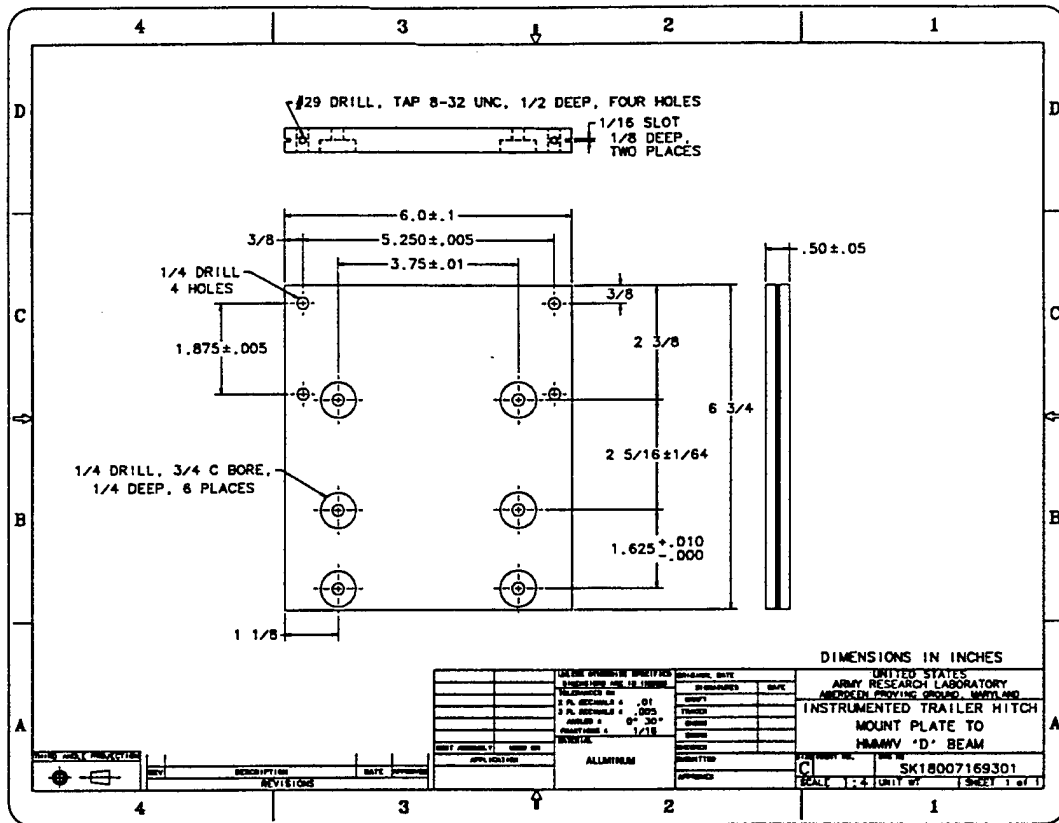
Beam Mount and Gear Head Adapter Plates.
